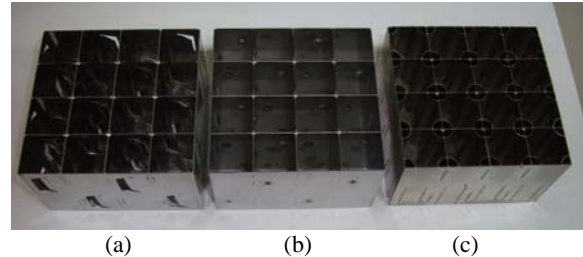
Three kinds of 4x4 partial supporting structure specimens manufactured by improving the current spacer grid technologies of the solid fuel: (a) Cantilever type; (b) Embossing type; (c) Insertion type.
